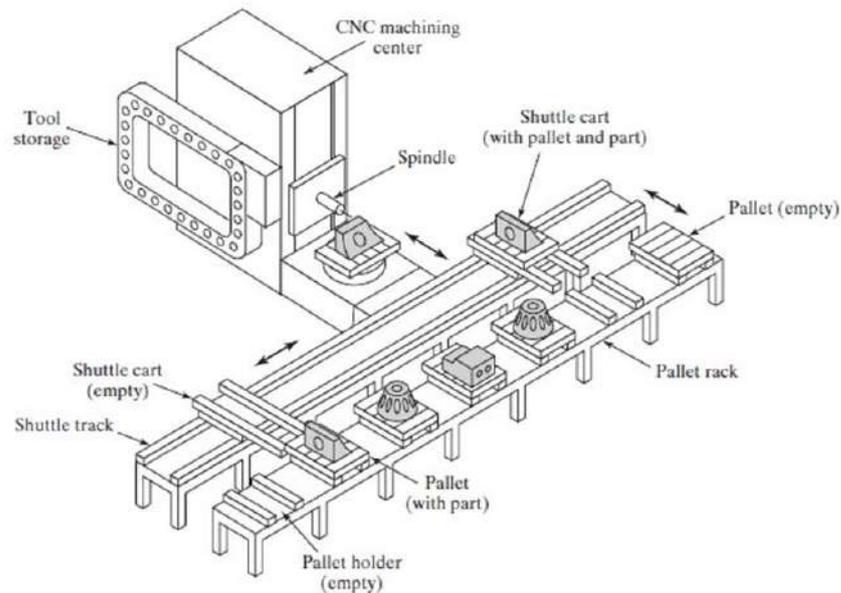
Single-machine cell consisting of one CNC machining centre and parts storage Unit
